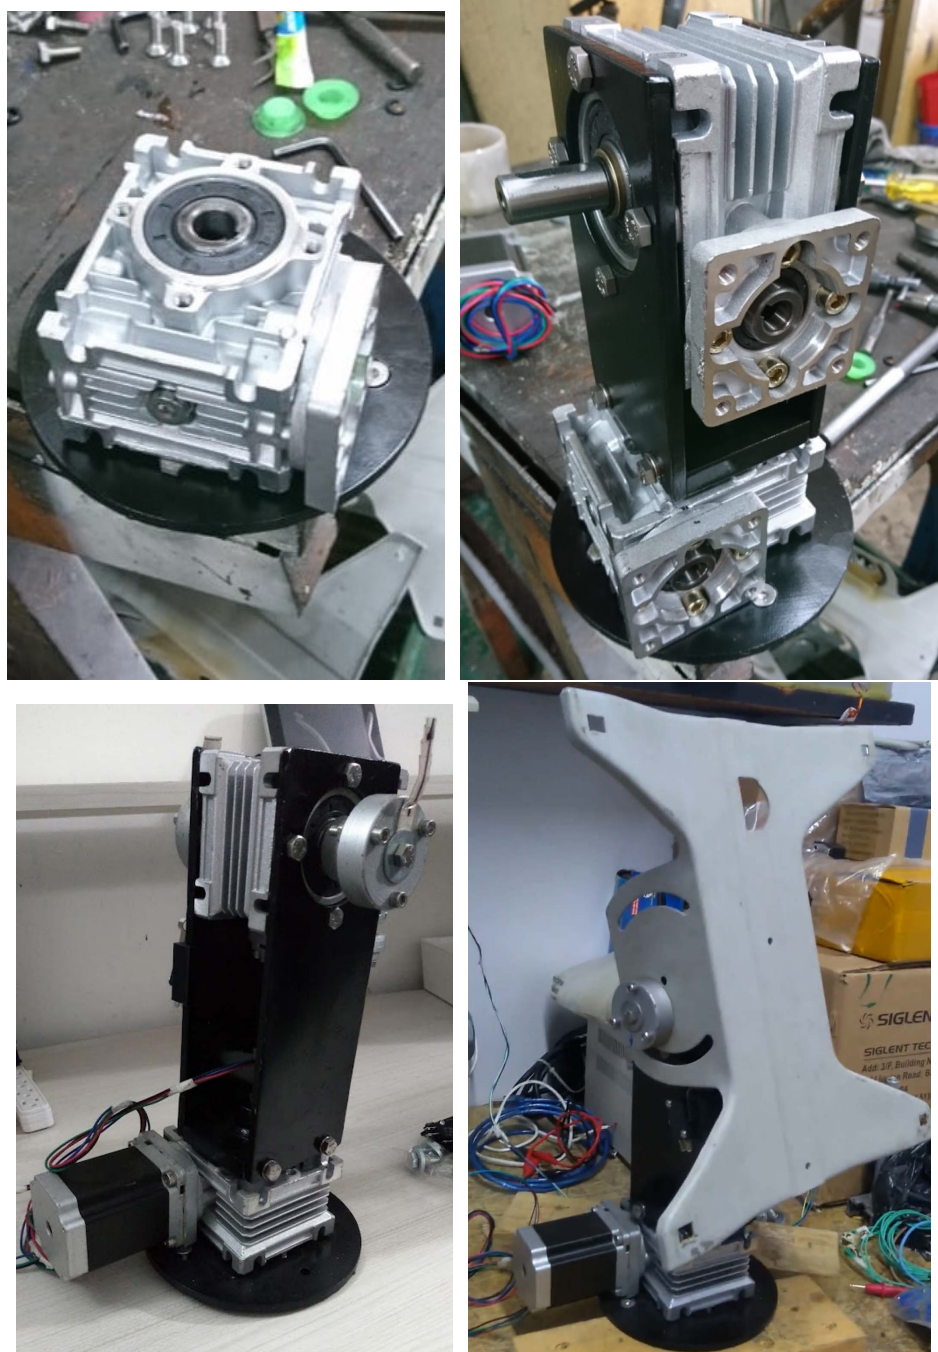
Motor assembly process for antenna element. Top, Left: Gearbox for Azimuth motion. Top, Right: Assembled gearboxes and metal enclosures. Bottom, Left: Stepper motors attached to gearbox system. Bottom, Right: Assembled motor system with dish support plate.
